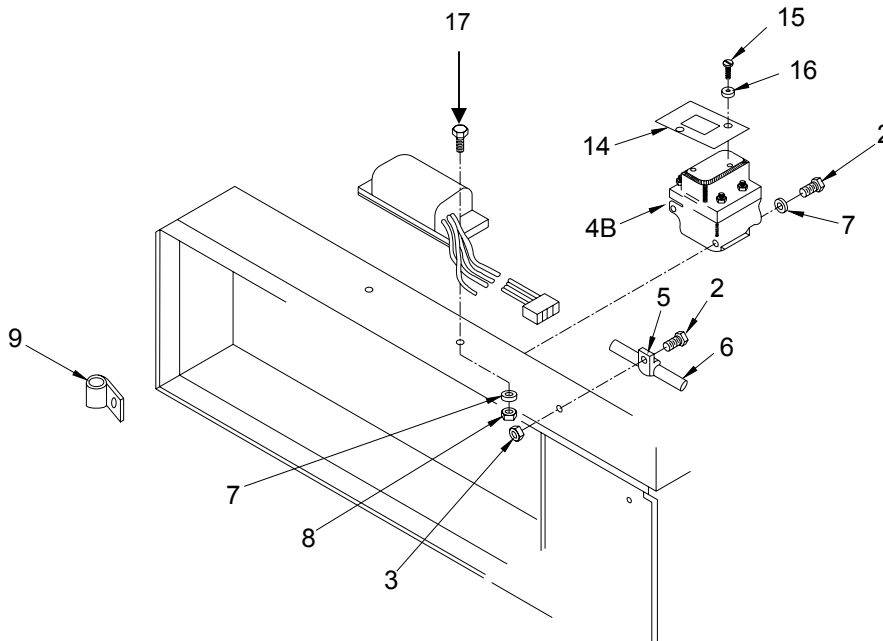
ELECTRICAL SYSTEM ASSEMBLY/CONTACTOR ASSEMBLY
